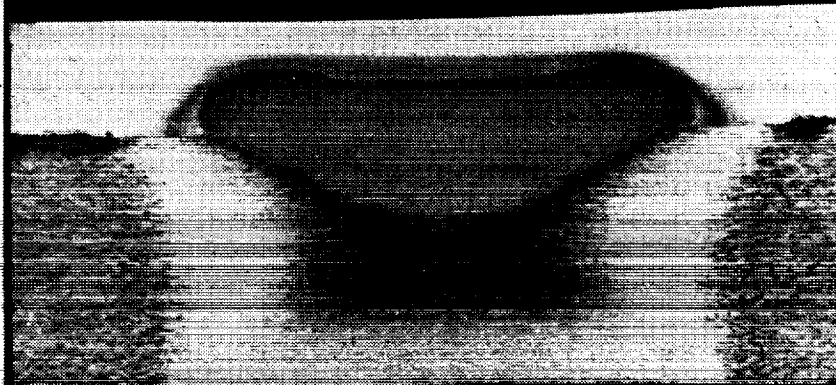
Panel 8 Pre-test Spot Weld Nuggets 0.070" 7475-T62 joined to 0.190" 2219-T81 Al.
